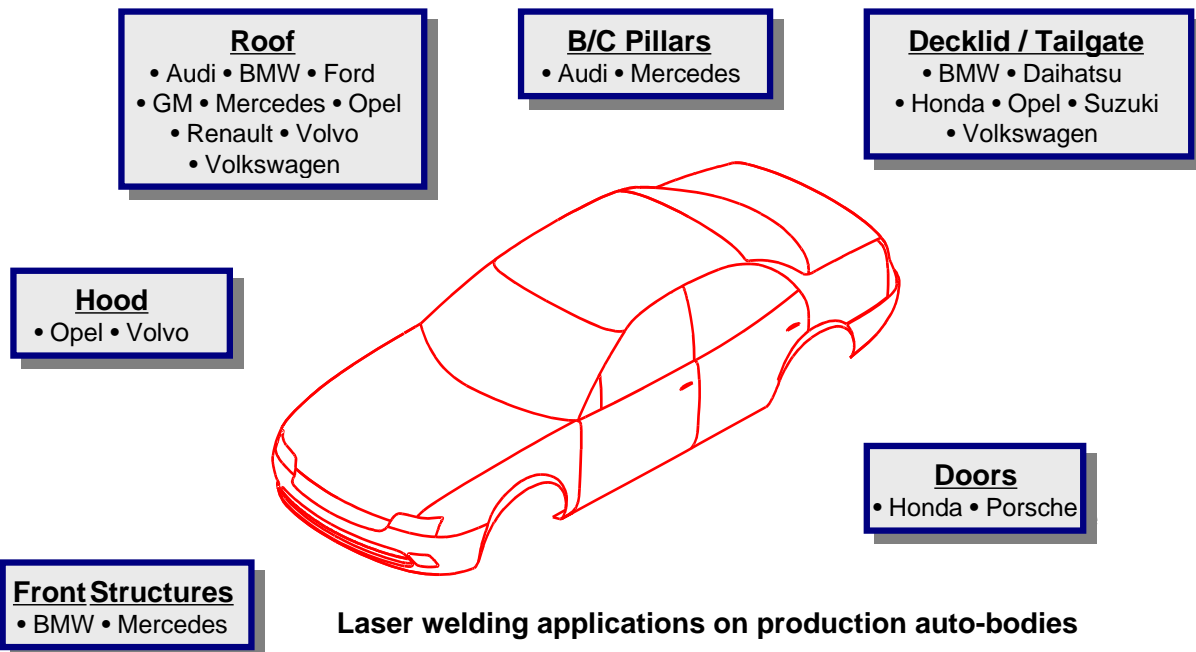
Laser Welding in Assembly
